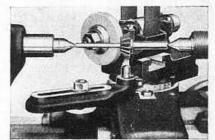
Sharpening a Valve Seat Reamer in the Lathe
